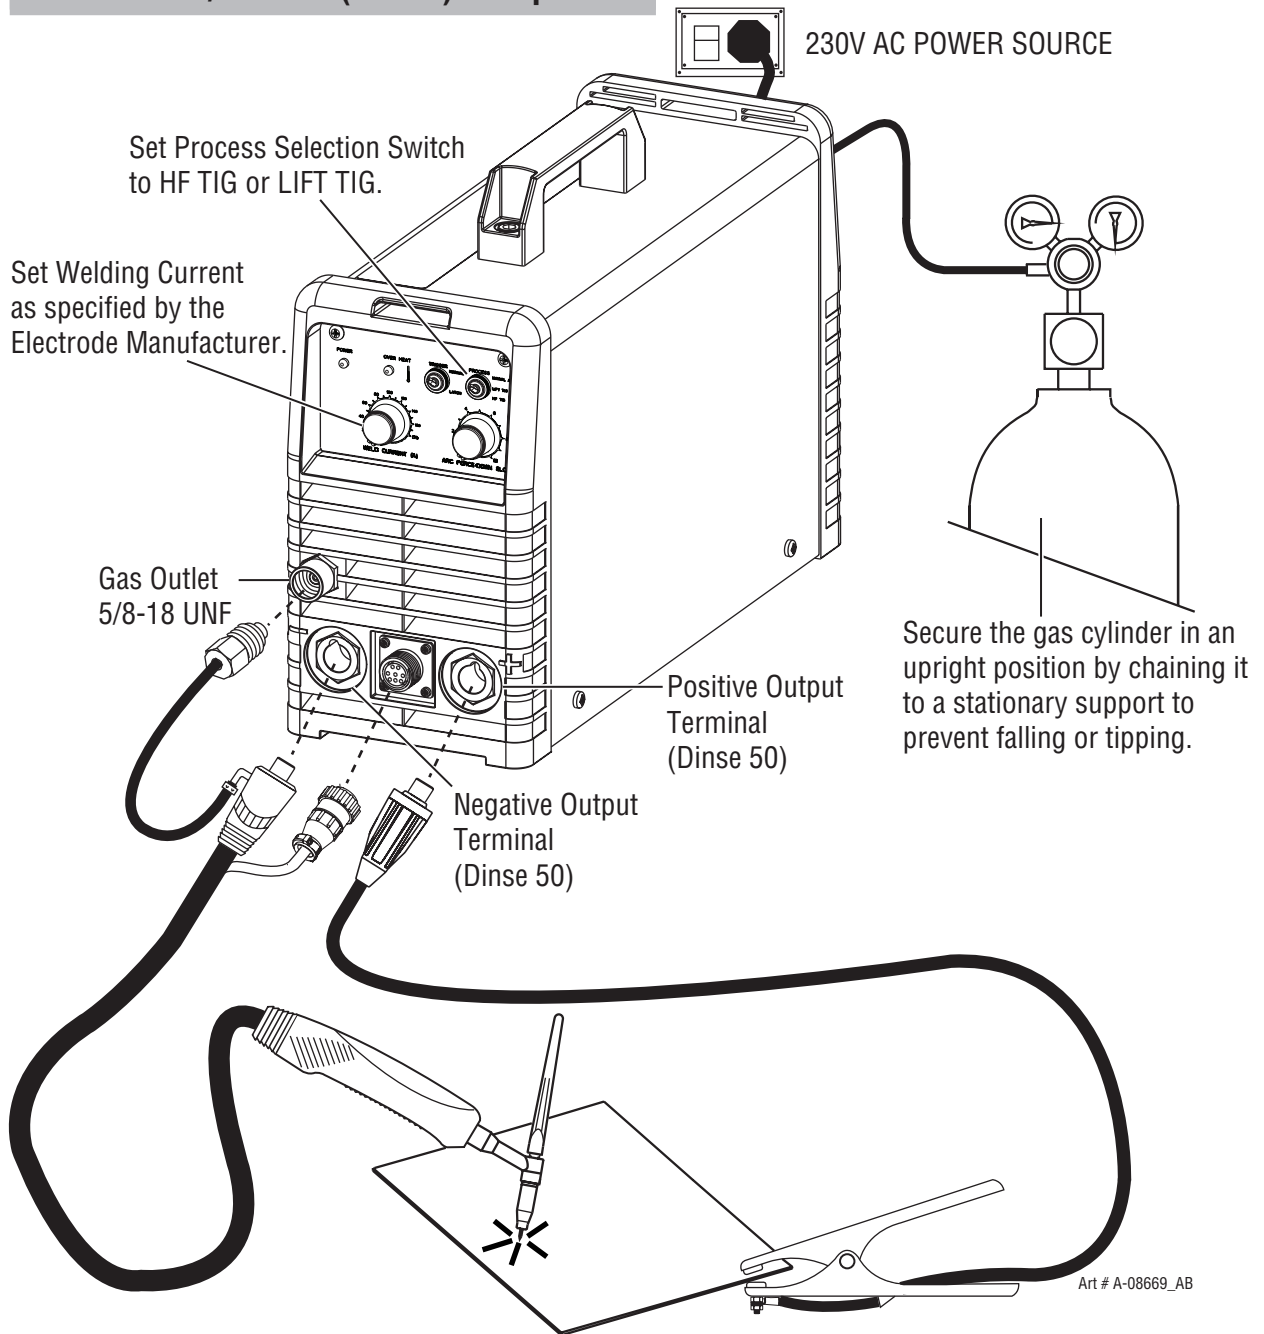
Setup for Lift TIG (GTAW) Welding
